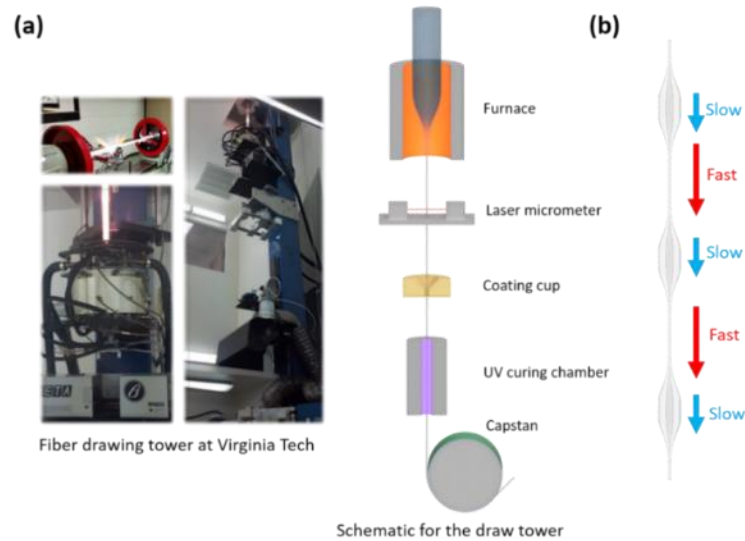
(a) Photograph and schematic drawing for the fiber drawing tower at Virginia Tech. (b) Method to fabricate horn integrated fiber.
